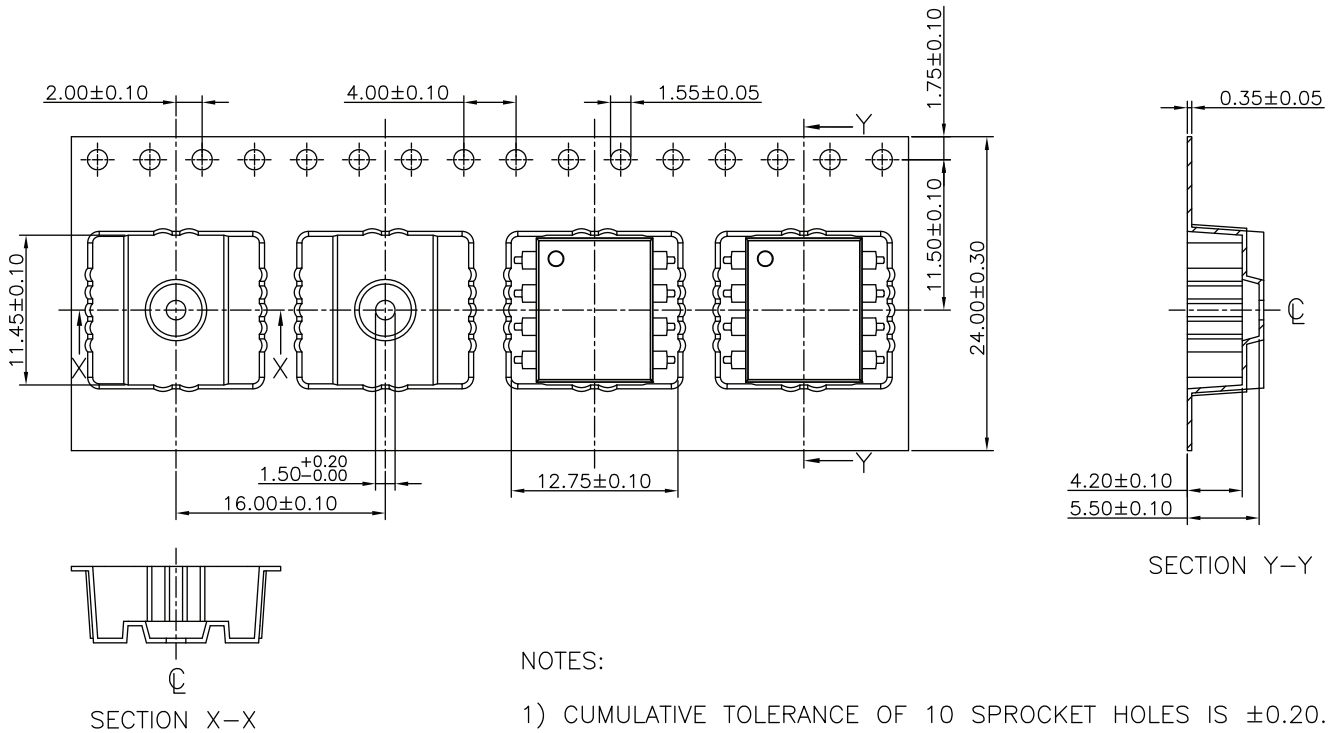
Tape and Reel Packing Option 7 (750 parts per reel)
